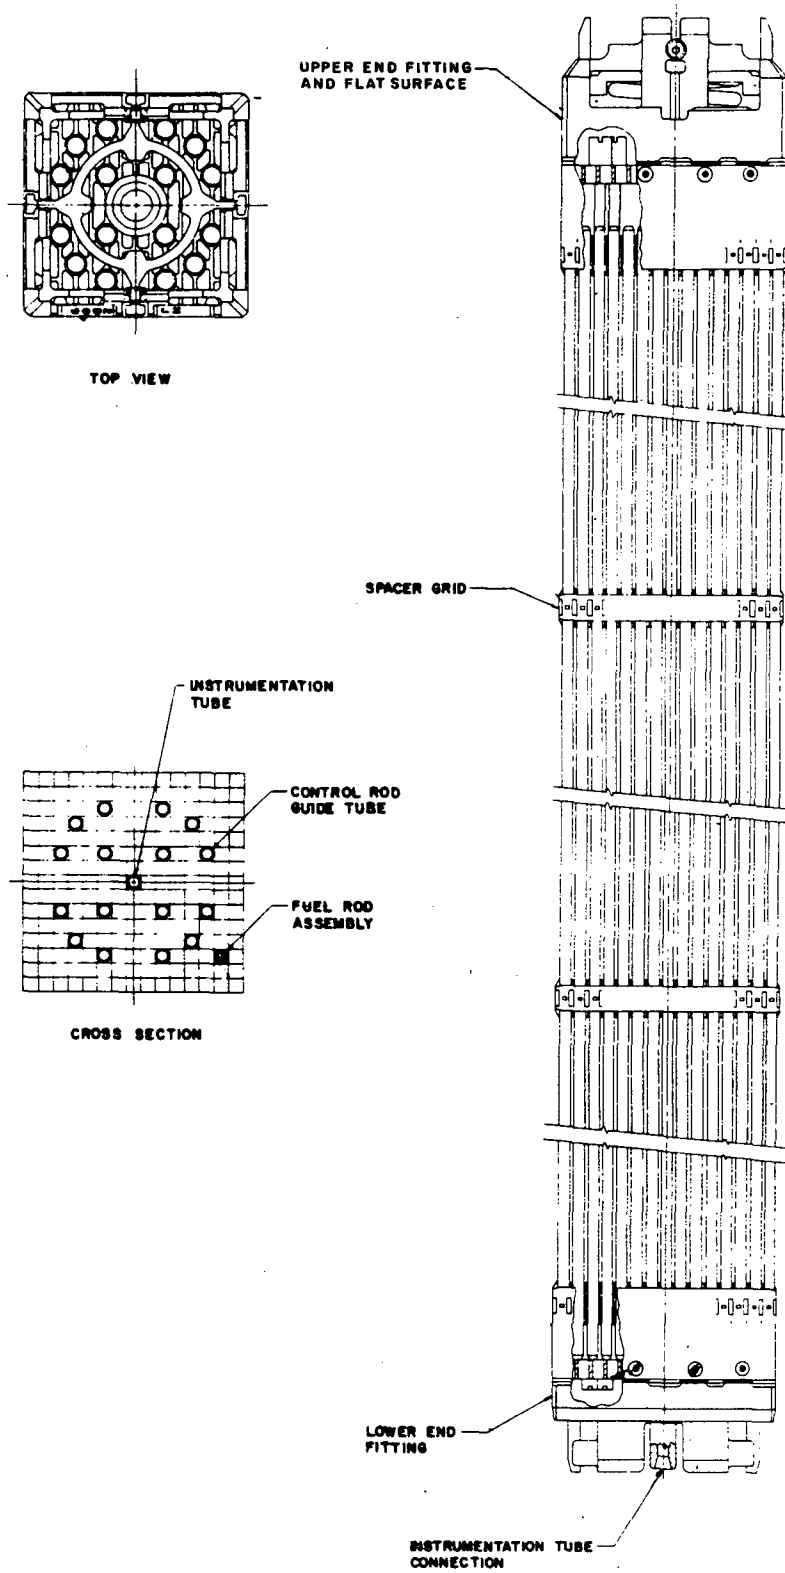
TMI Unit 2 Reactor Fuel Assembly.
